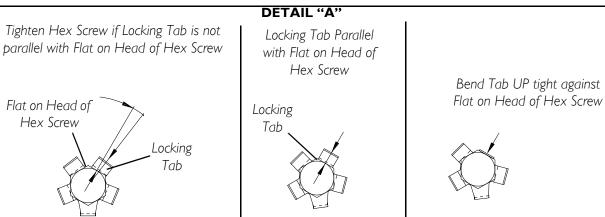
REMOVING/INSTALLING THE DRIVE WHEEL FROM THE 2-POLE OR 4-POLE MOTOR - 14 X 3-INCH WHEELS
